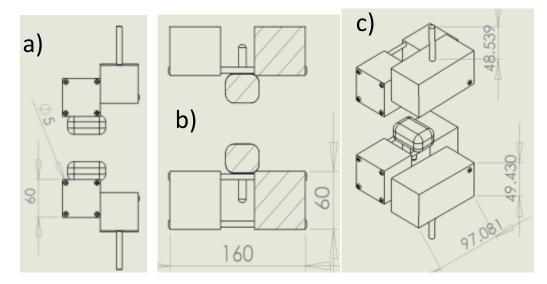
Design Alternative 4 – a) Side views of Aluminum Compression Box method; b) Front View; c) Overview of whole fixture
